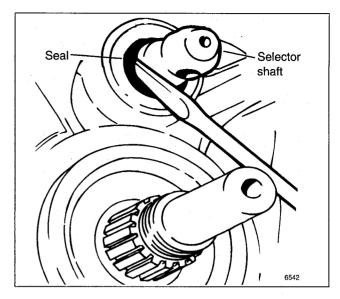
Selector shaft oil seal being pried out with screwdriver.
